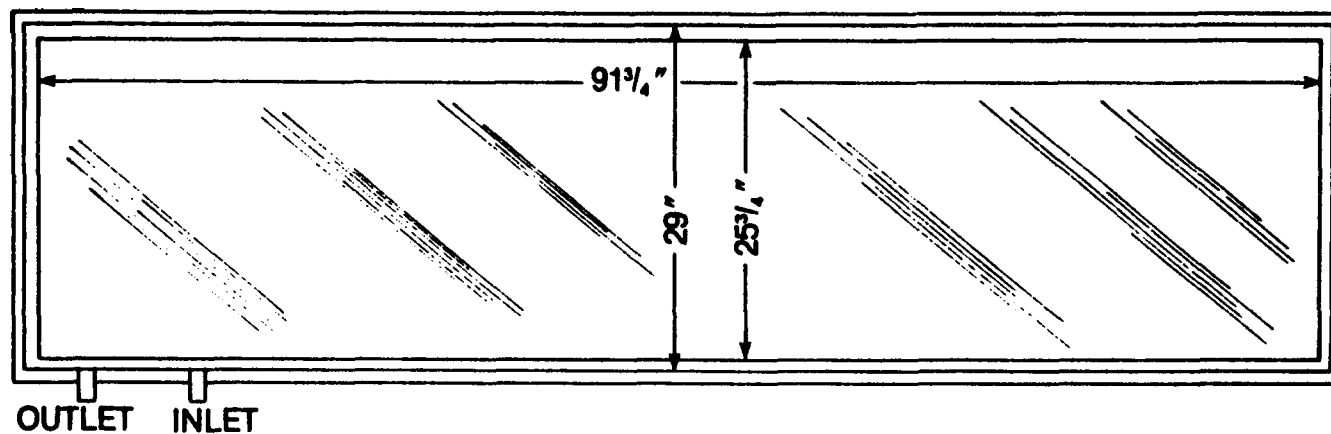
OVERALL COLLECTOR DIMENSIONS
